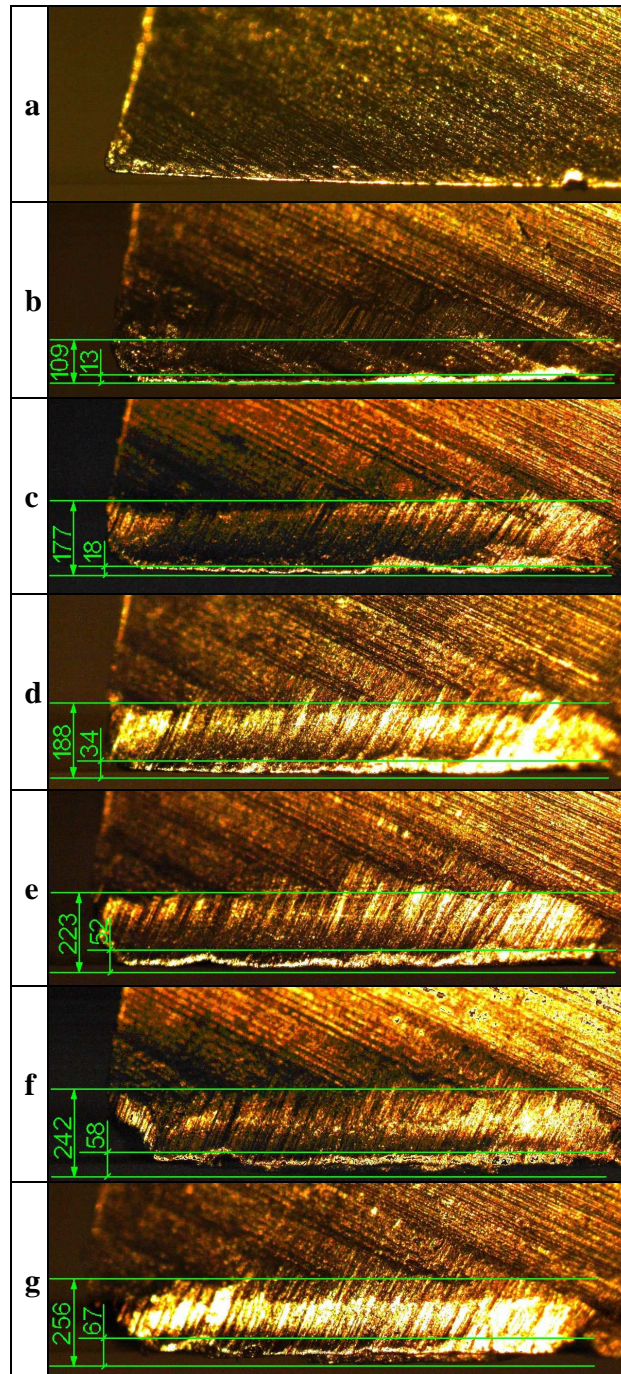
MTE 9mm end mill tooth # 3 linear toolpath rake face wear a) Fresh tool, b-g) After pass 1-6 (each 162 mm length, 9 mm width, 1 mm depth).
